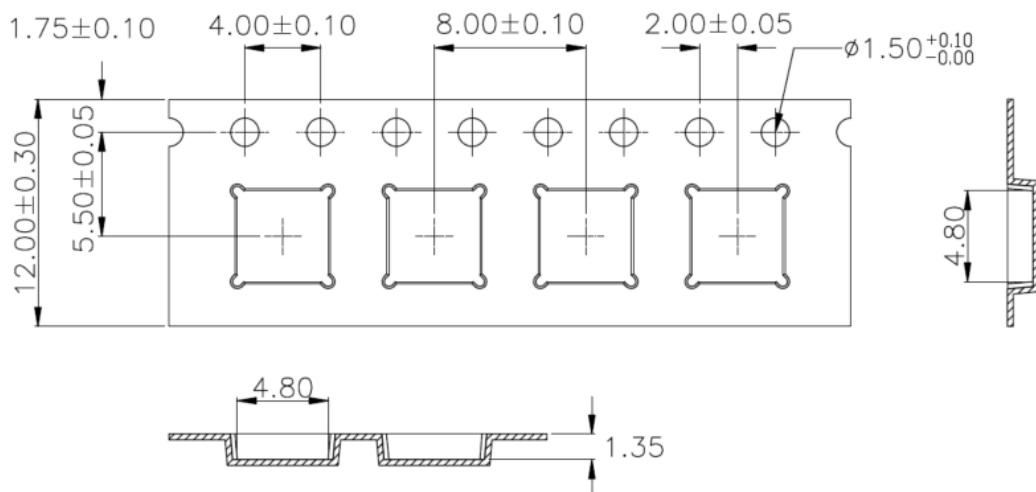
$4.5 \times 4.5 \text{ mm}^2$ Tape Dimension (for package height 1.1 mm)
